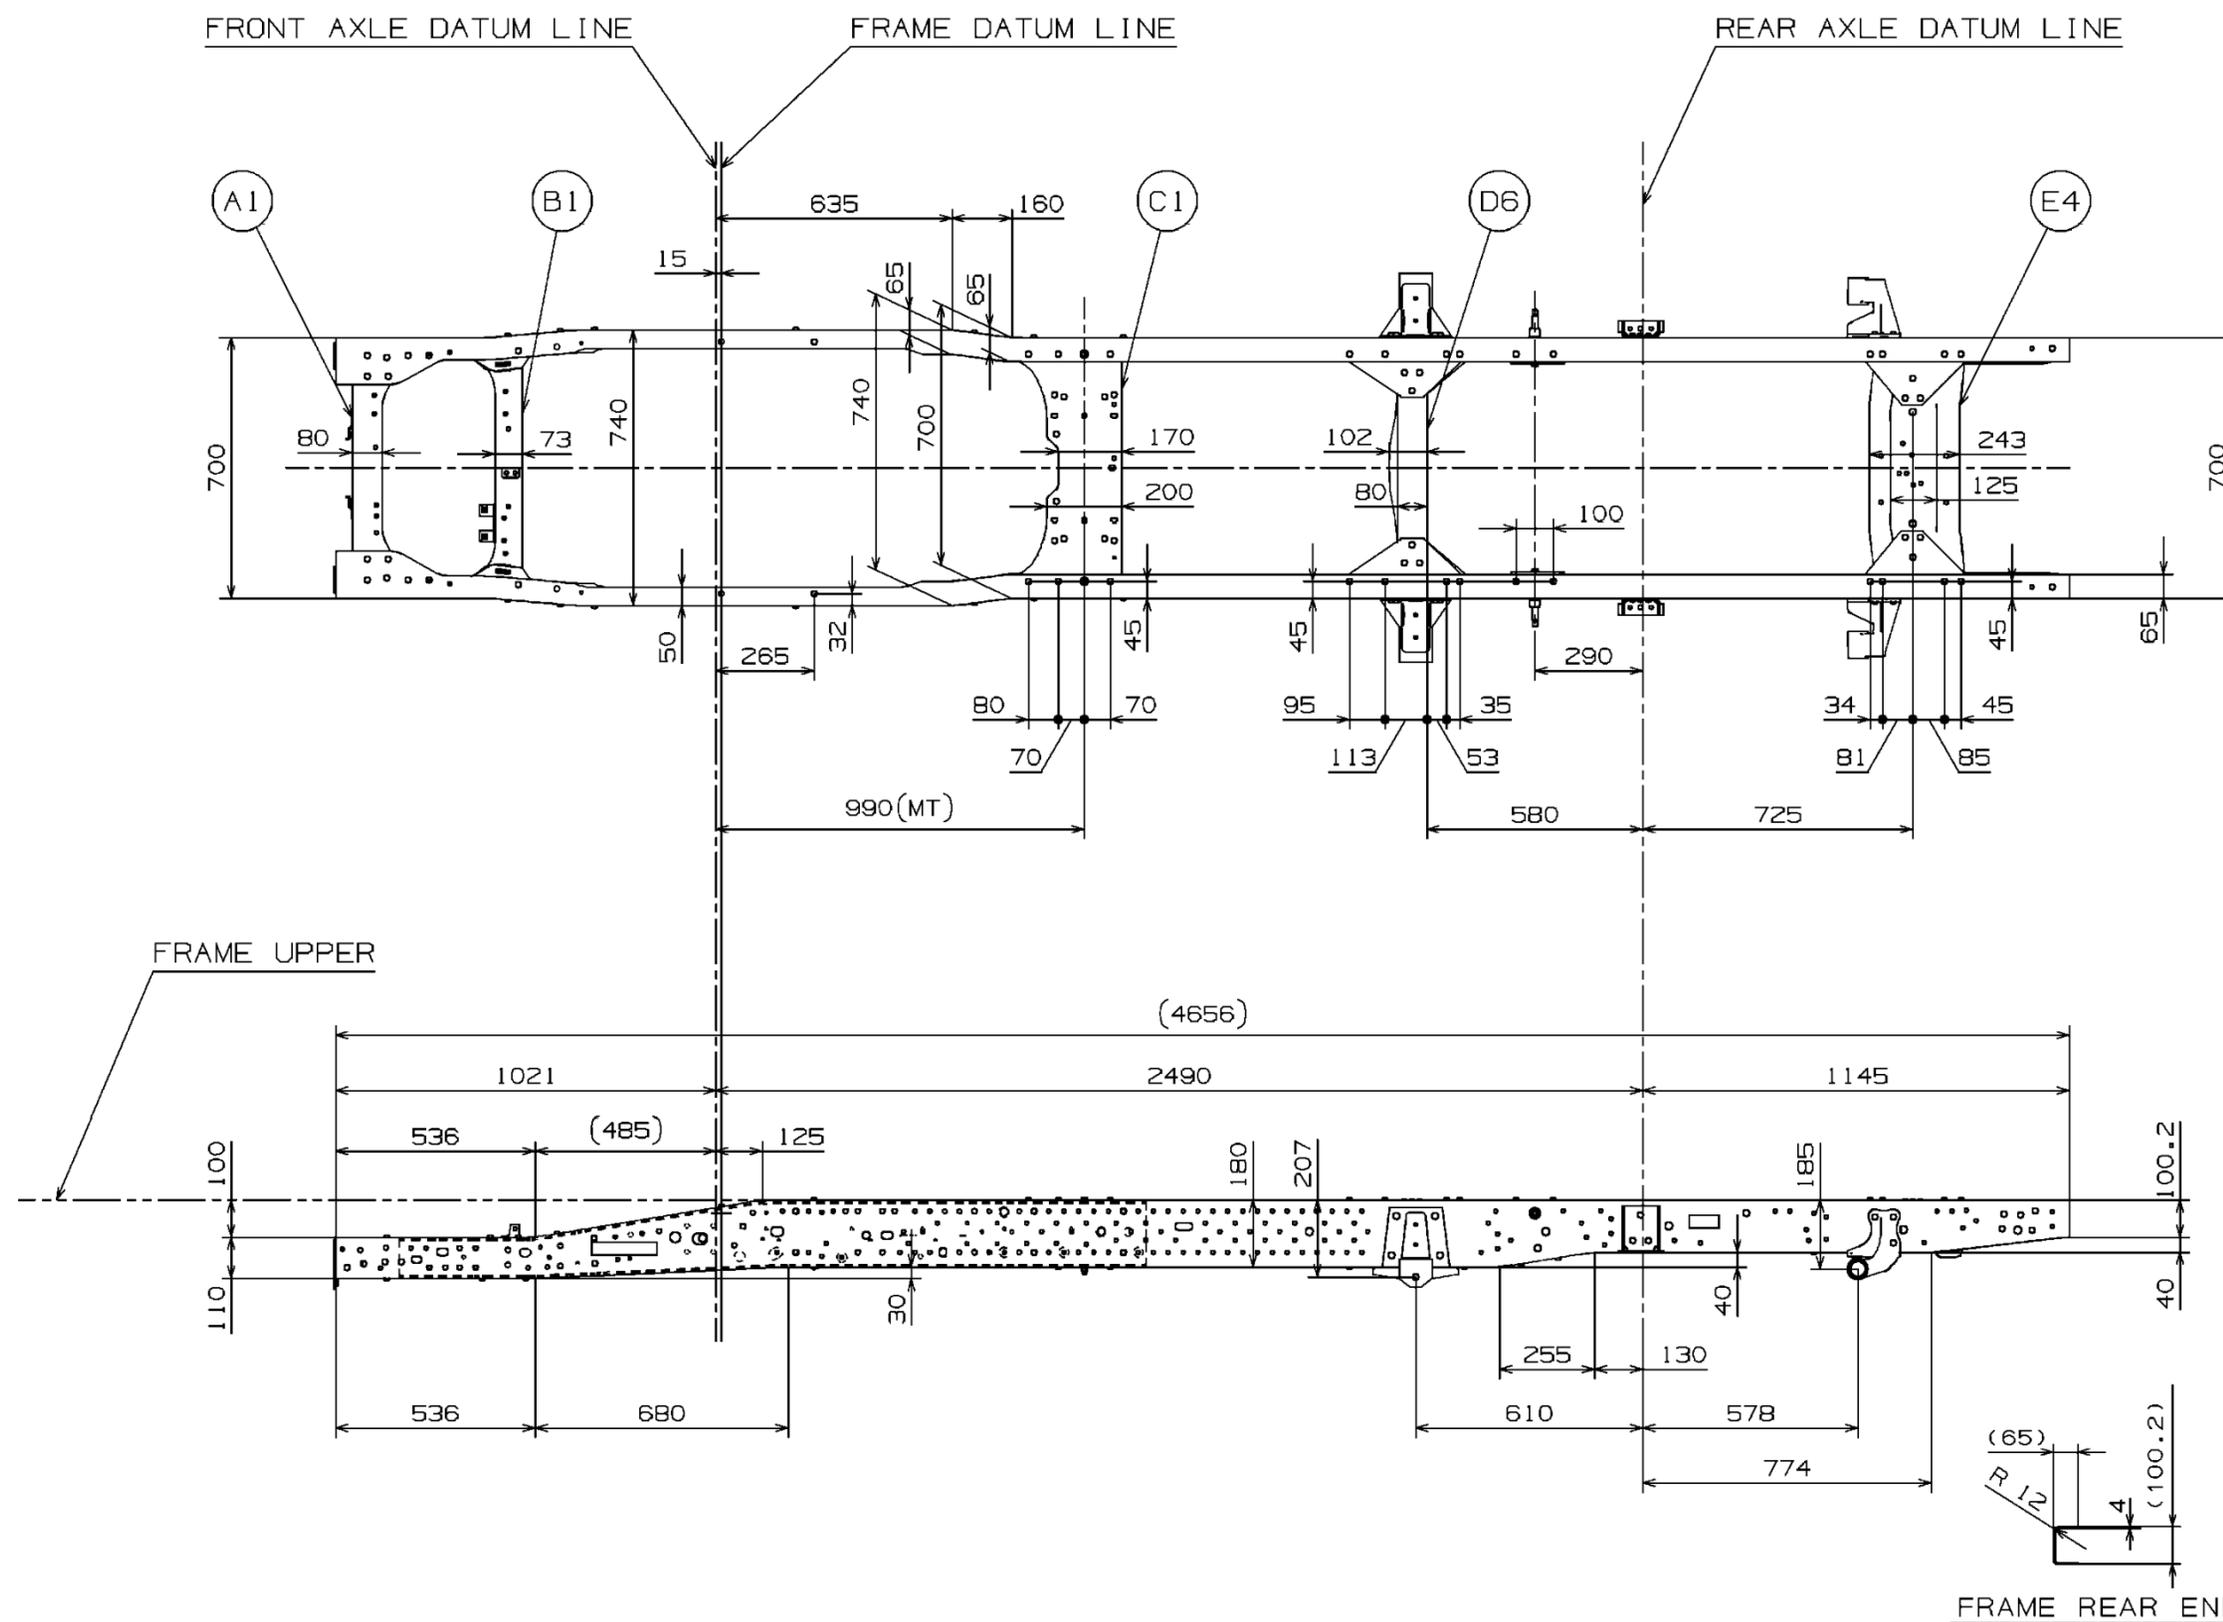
Chassis Frame Drawing NLR85AL-ED5AYEN
